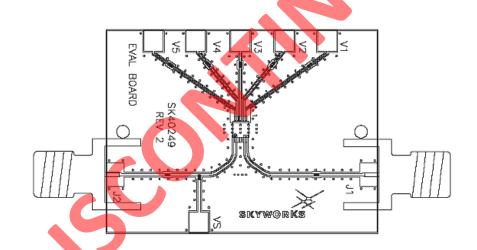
SKY12322-86LF Evaluation Board Assembly Diagram
